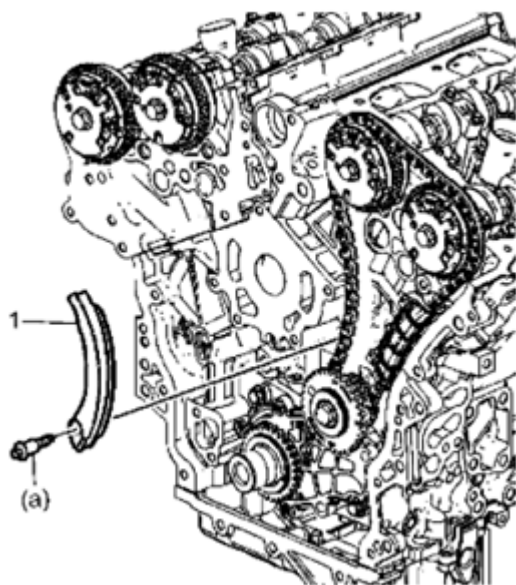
Identifying Timing Chain Guide No. 3
